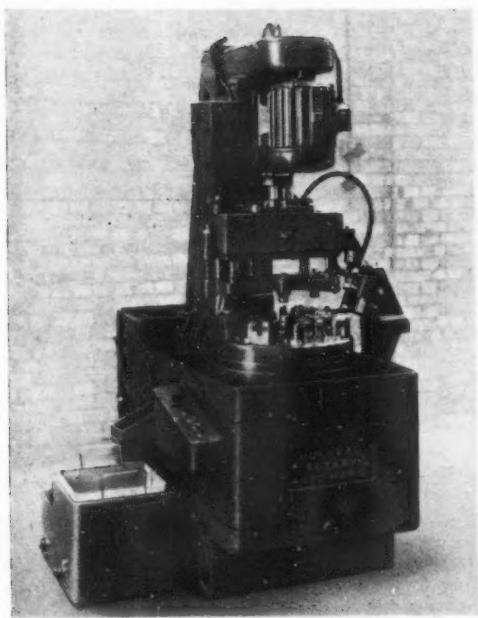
Mulhead Rotary Auto-Matic Machine Set Up for Drilling Pole Pieces
